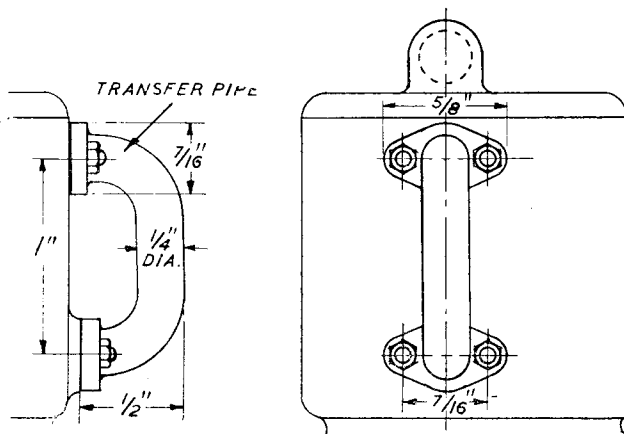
Showing how a transfer pipe may be fitted to communicate between water jackets in main and cylinder-head blocks
